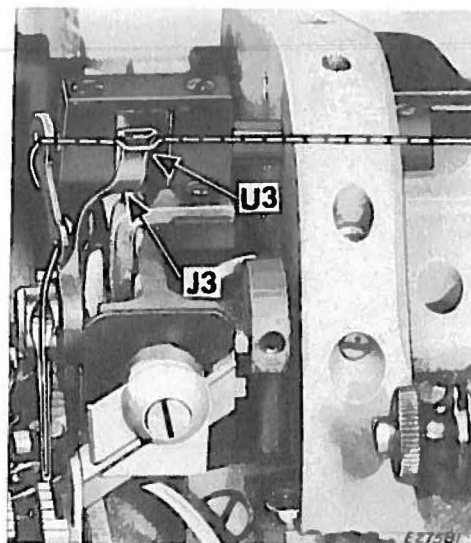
Needle Thread Controller 164151 in Correct Relation to Needle Thread
